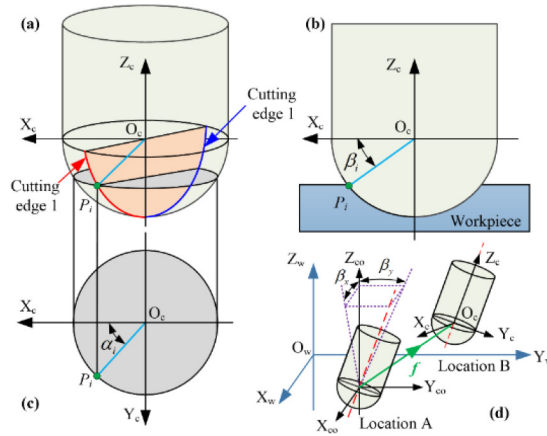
Illustration of ball-end milling cutter geometry (a)–(c) and the cutter movement in the workpiece coordinate system.
